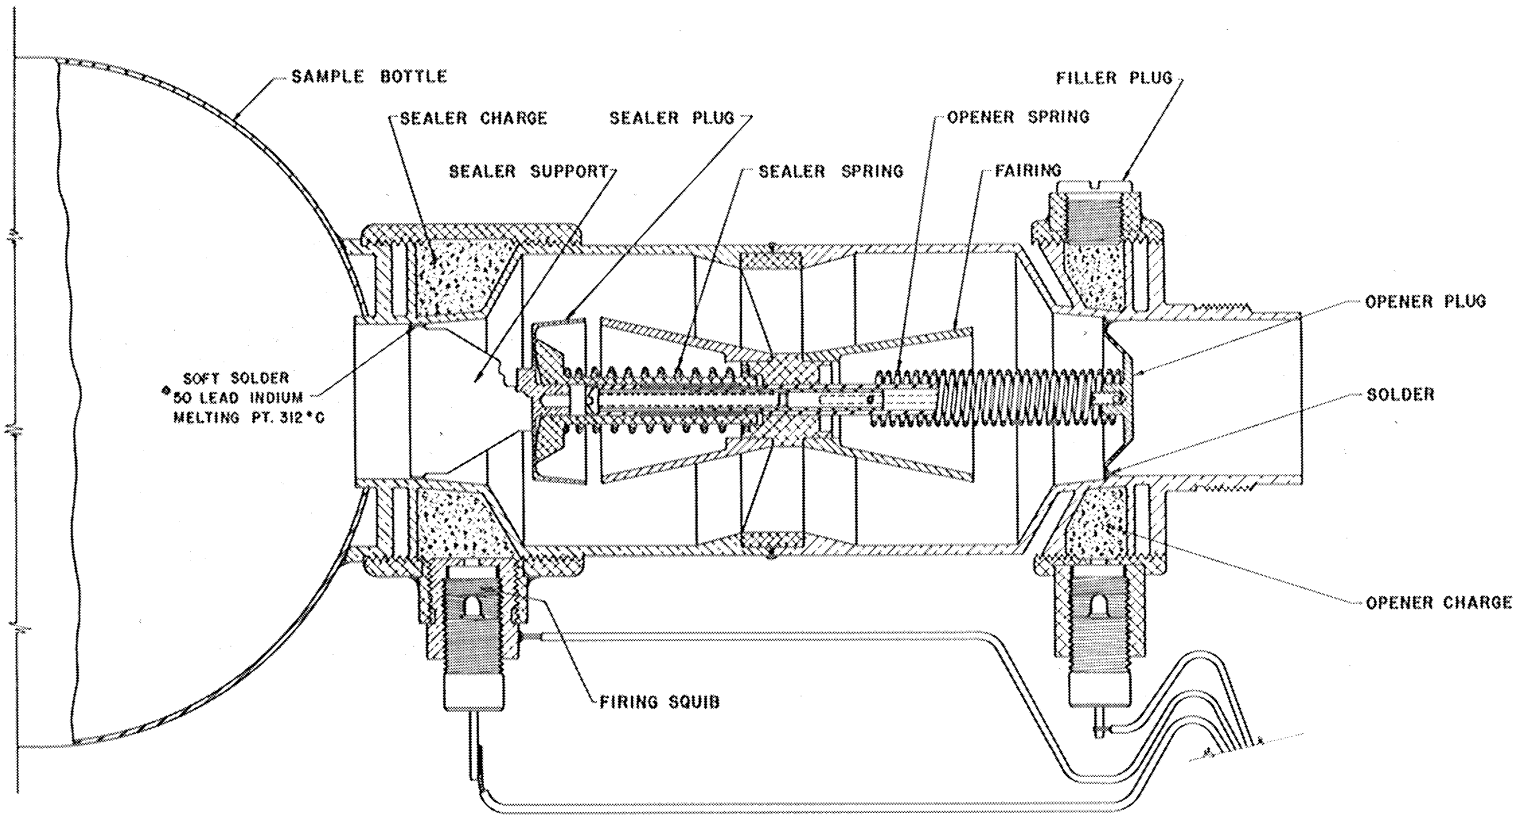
Schematic of Pyrotechnic-Soldered Disc Sealer-Opener
